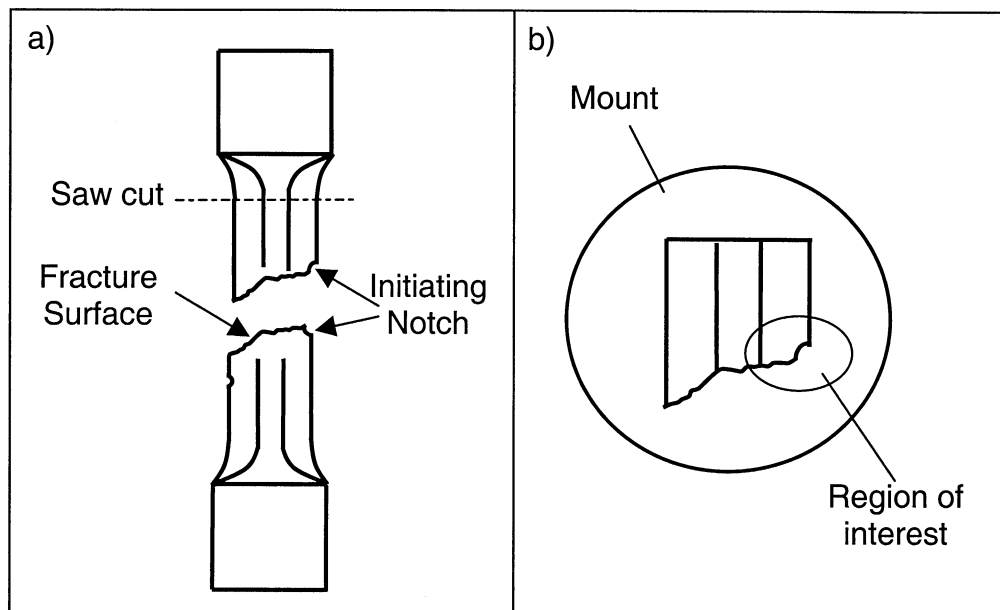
a) Illustration of Fractured Sample; b) Top view of mounted sample
